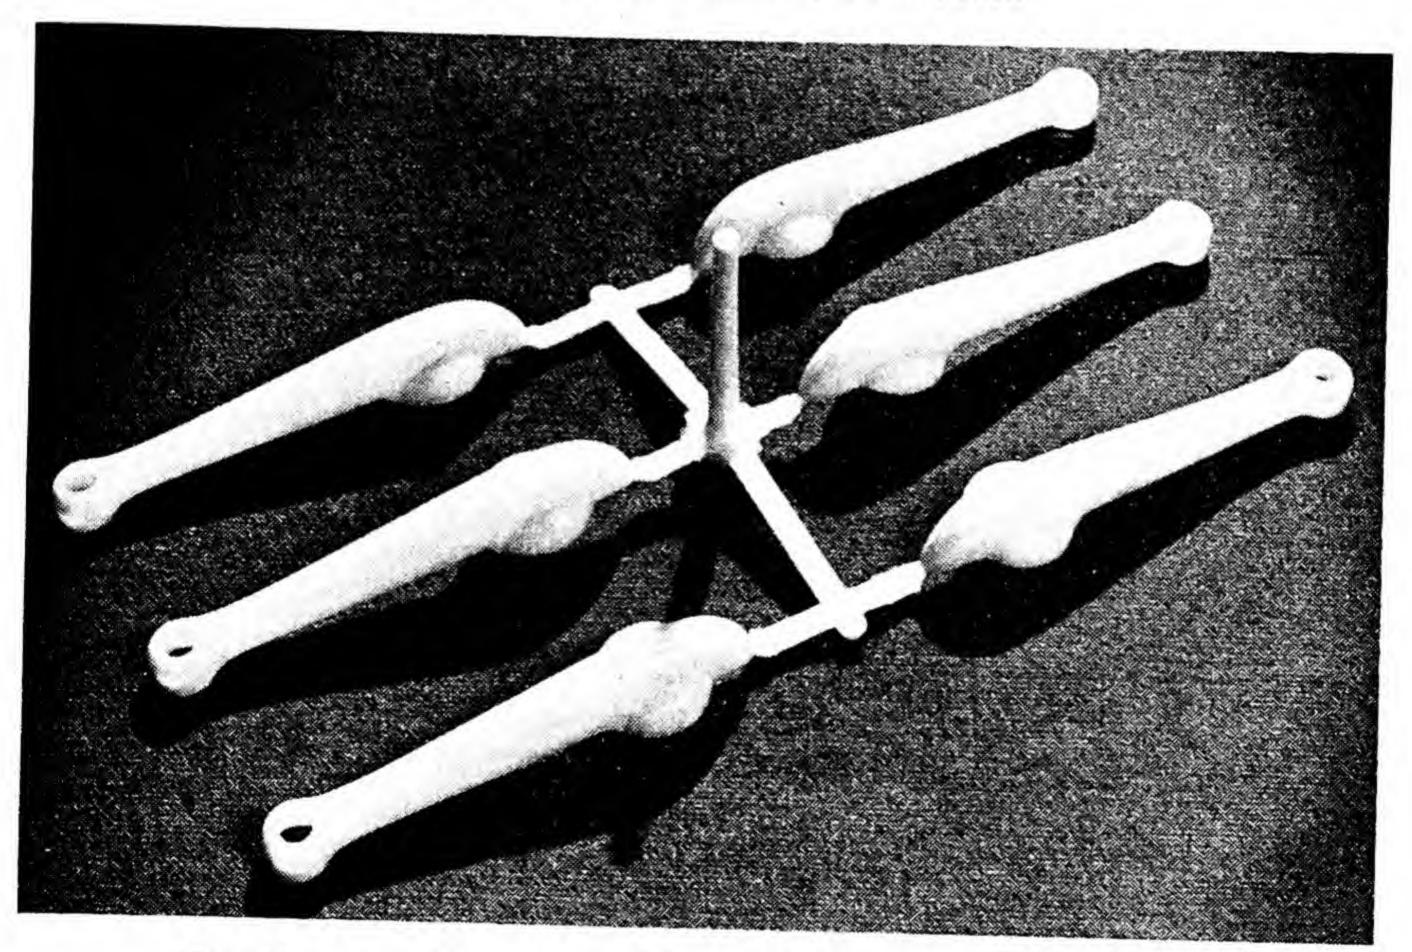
Assembly as removed from injection mold. (Sobenite, Inc.)
